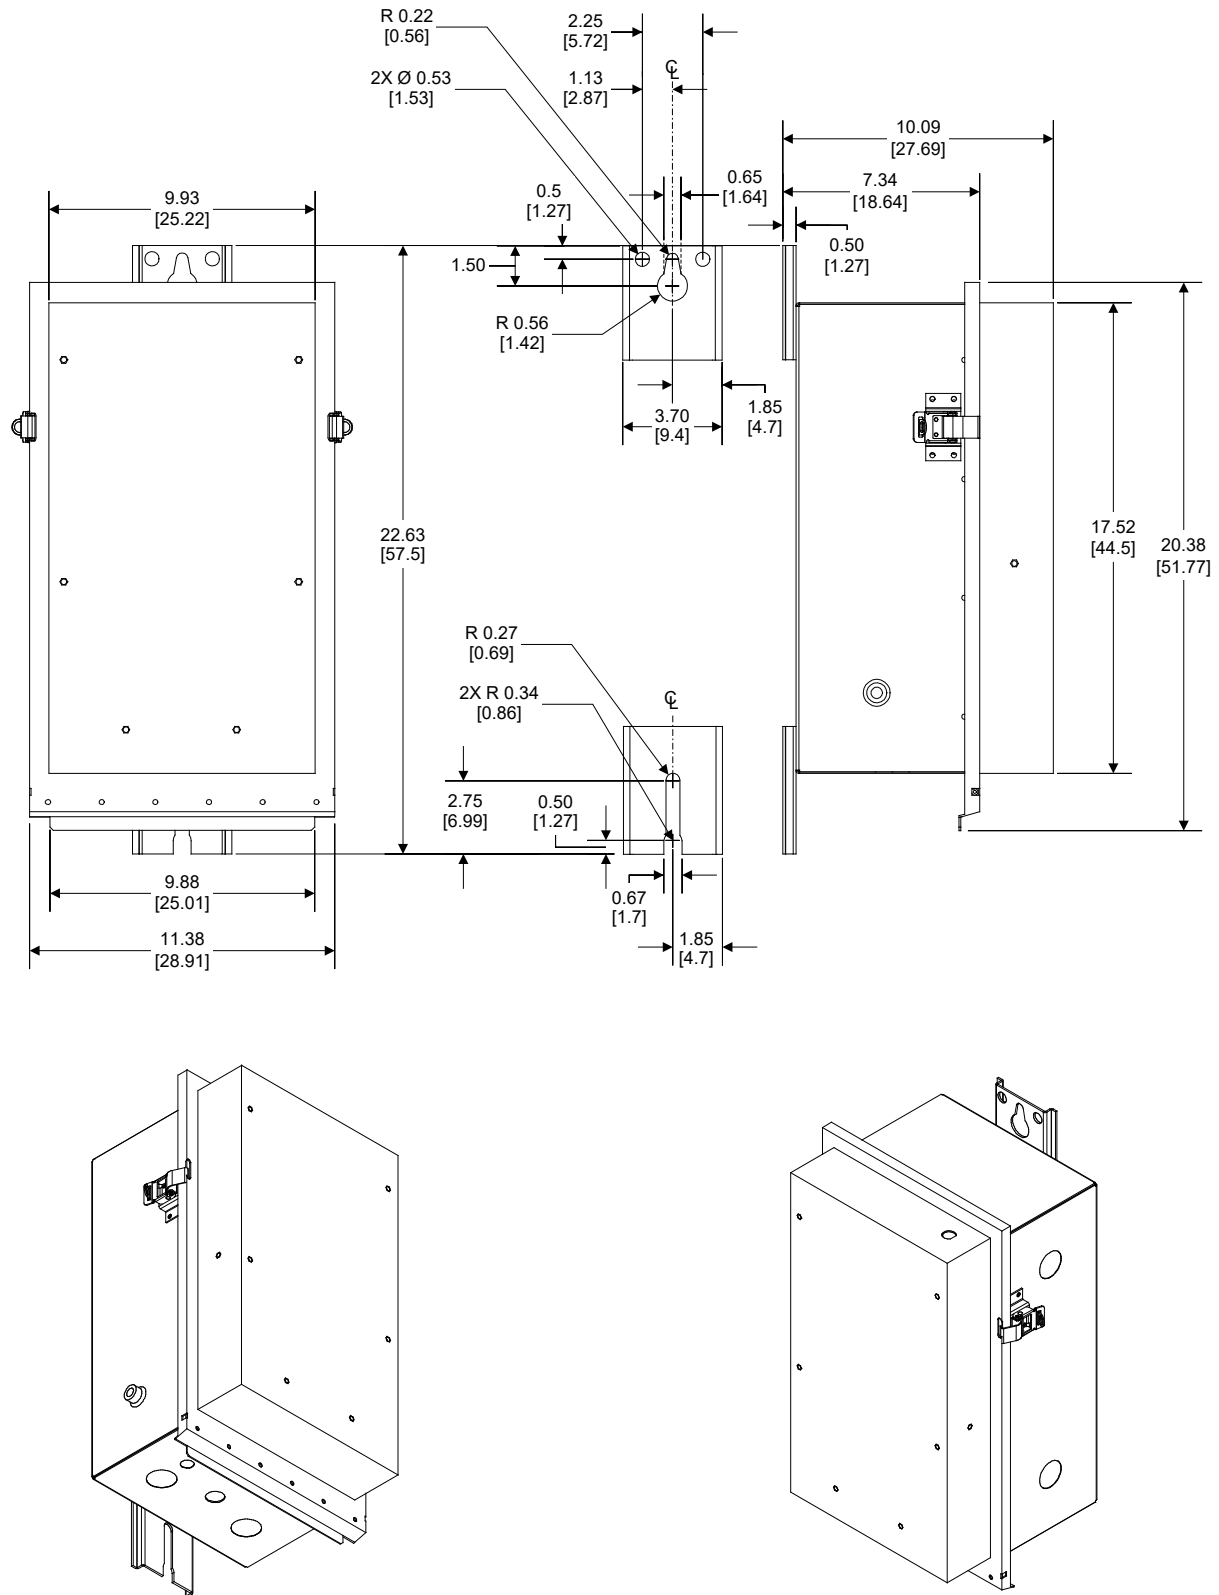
Cold Rolled Steel/Stainless Steel Dimensions
